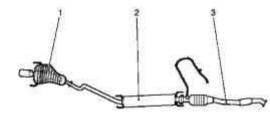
The design of the exhaust system (Z 20 LEL): 1 - endpoint muffler with exhaust pipe, 2 - central exhaust pipe with a central silencer, 3 - Front exhaust pipe with a flexible tube
